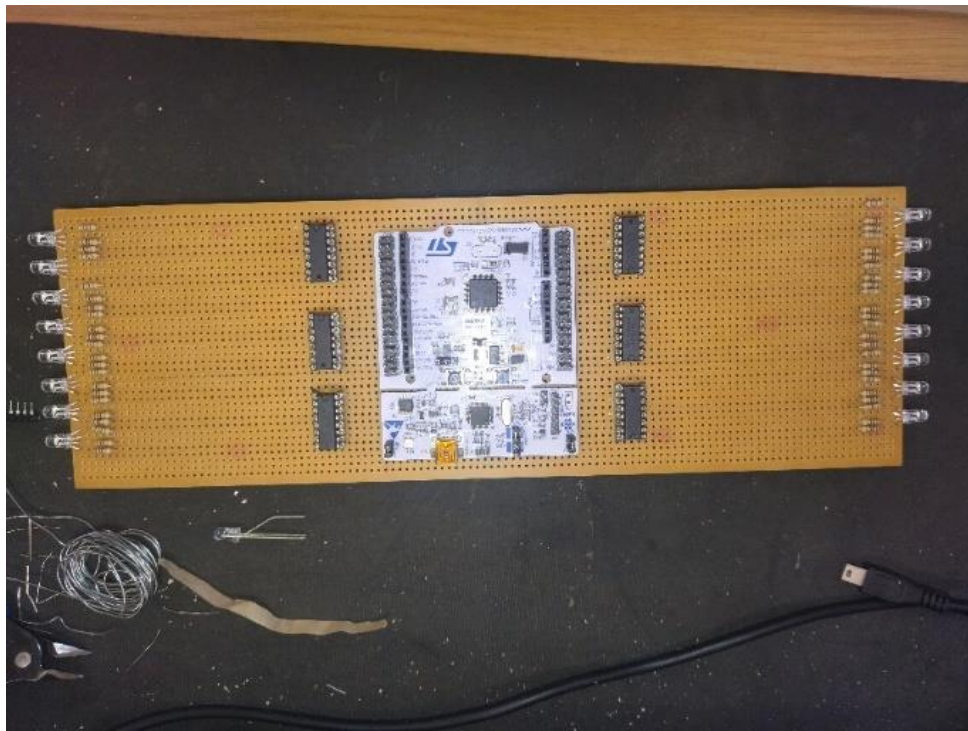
Completely soldered LED circuit. (NB: The microcontroller is not soldered to the Vero board.)
